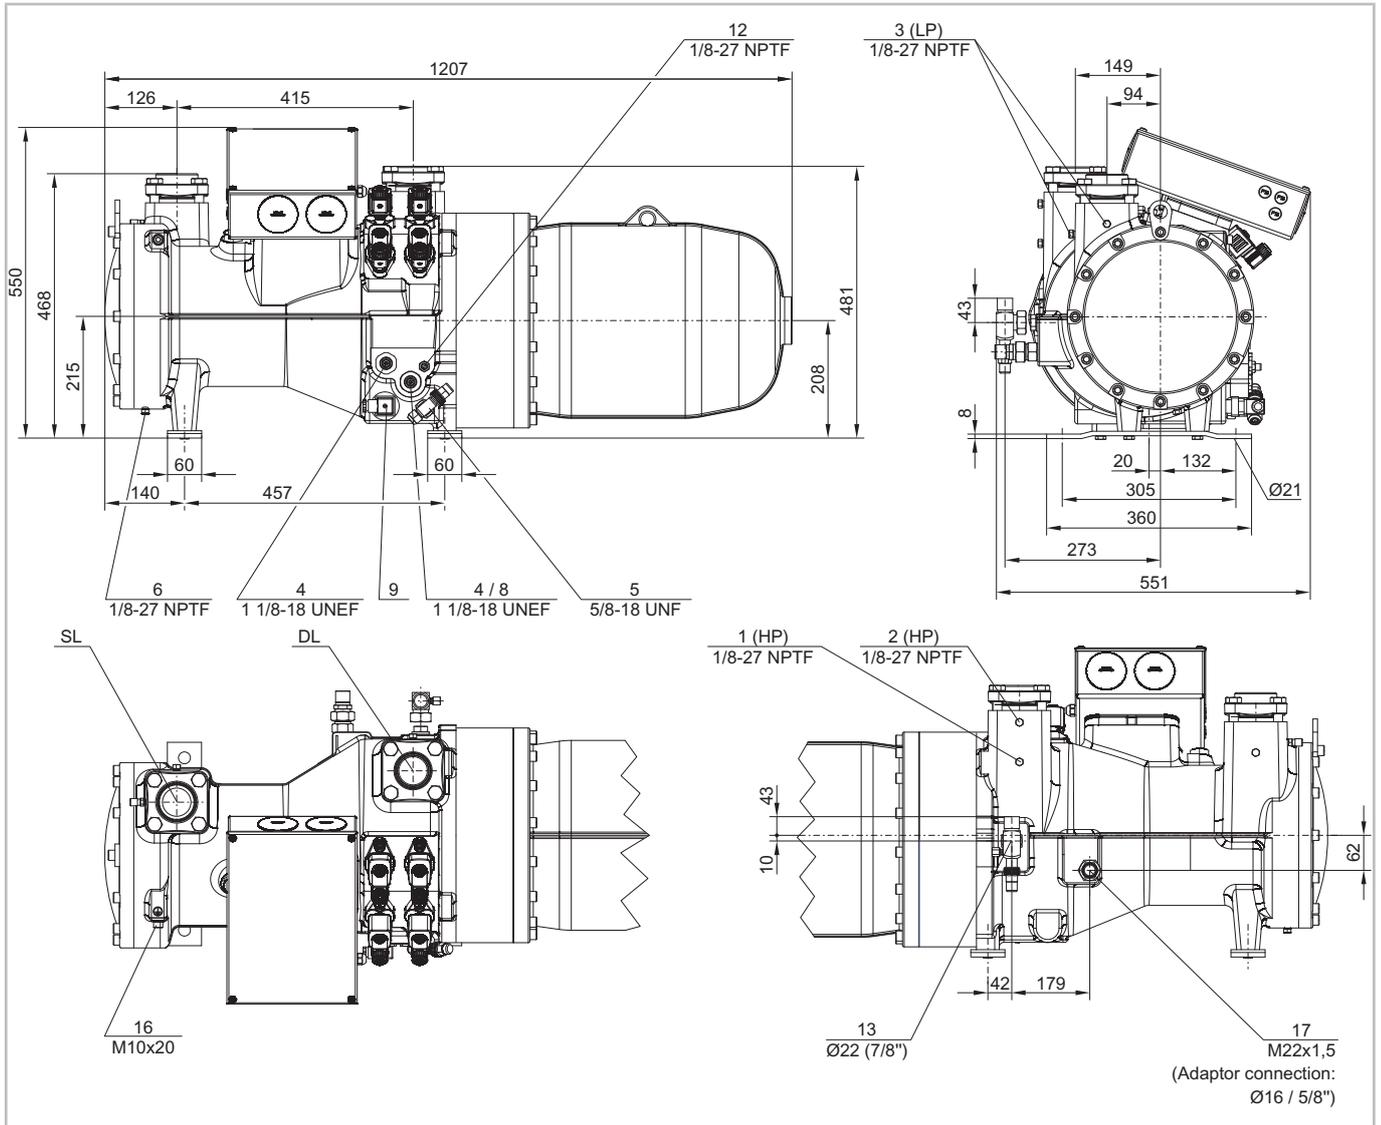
Dimensional drawing CSW6583-40Y .. CSW6593-60(Y)
